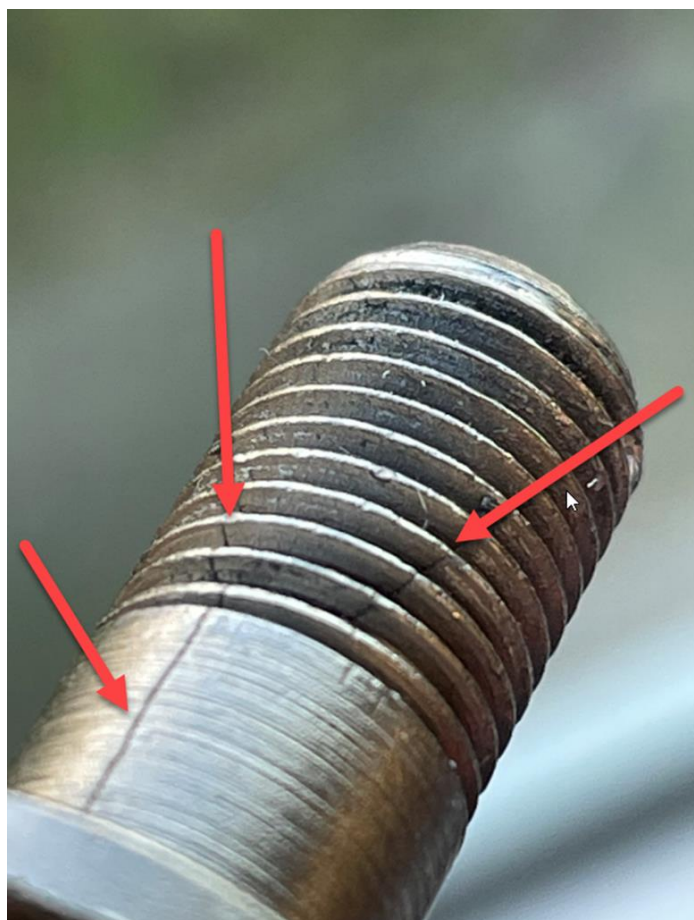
Cracked thread and shaft of Bolt P/N 43847001
